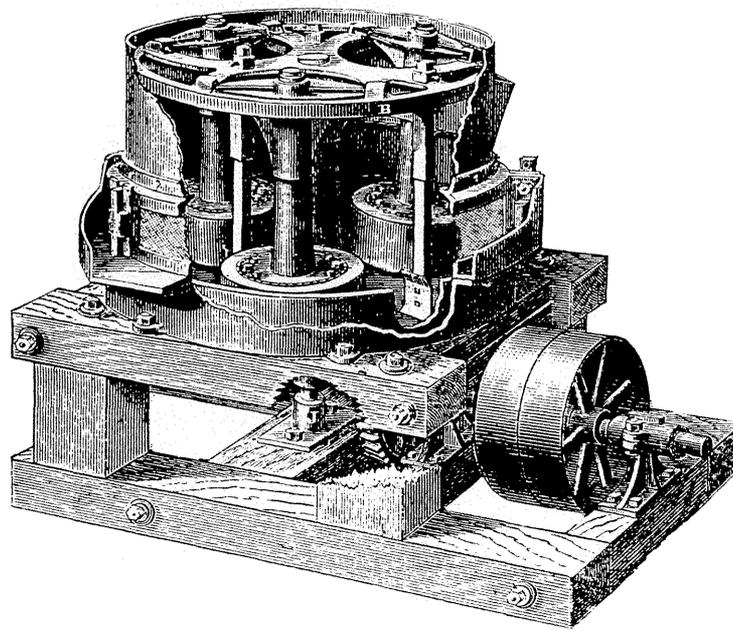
Huntingdon Mill, cutaway perspective¹⁵
